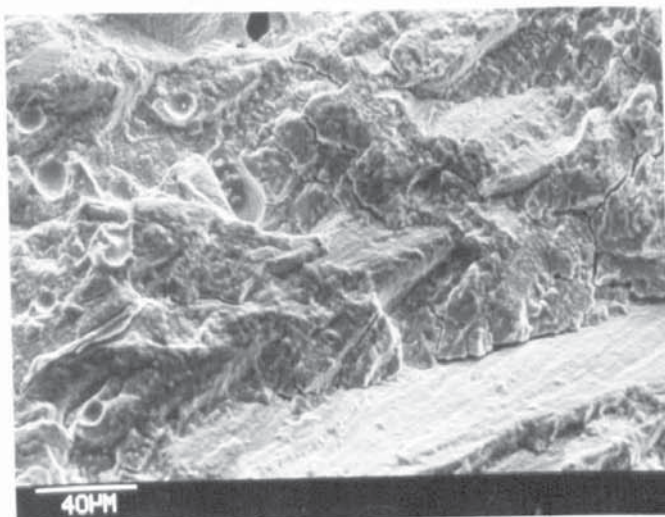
Fracture surfaces of fatigue crack propagation
